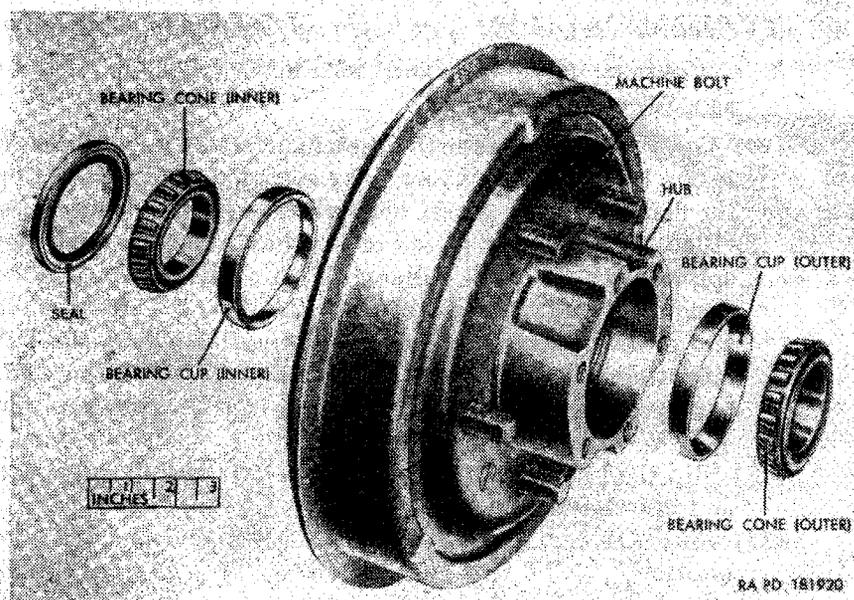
Front hub and drum, inner and outer bearing, and oil seal assembly—exploded view.
